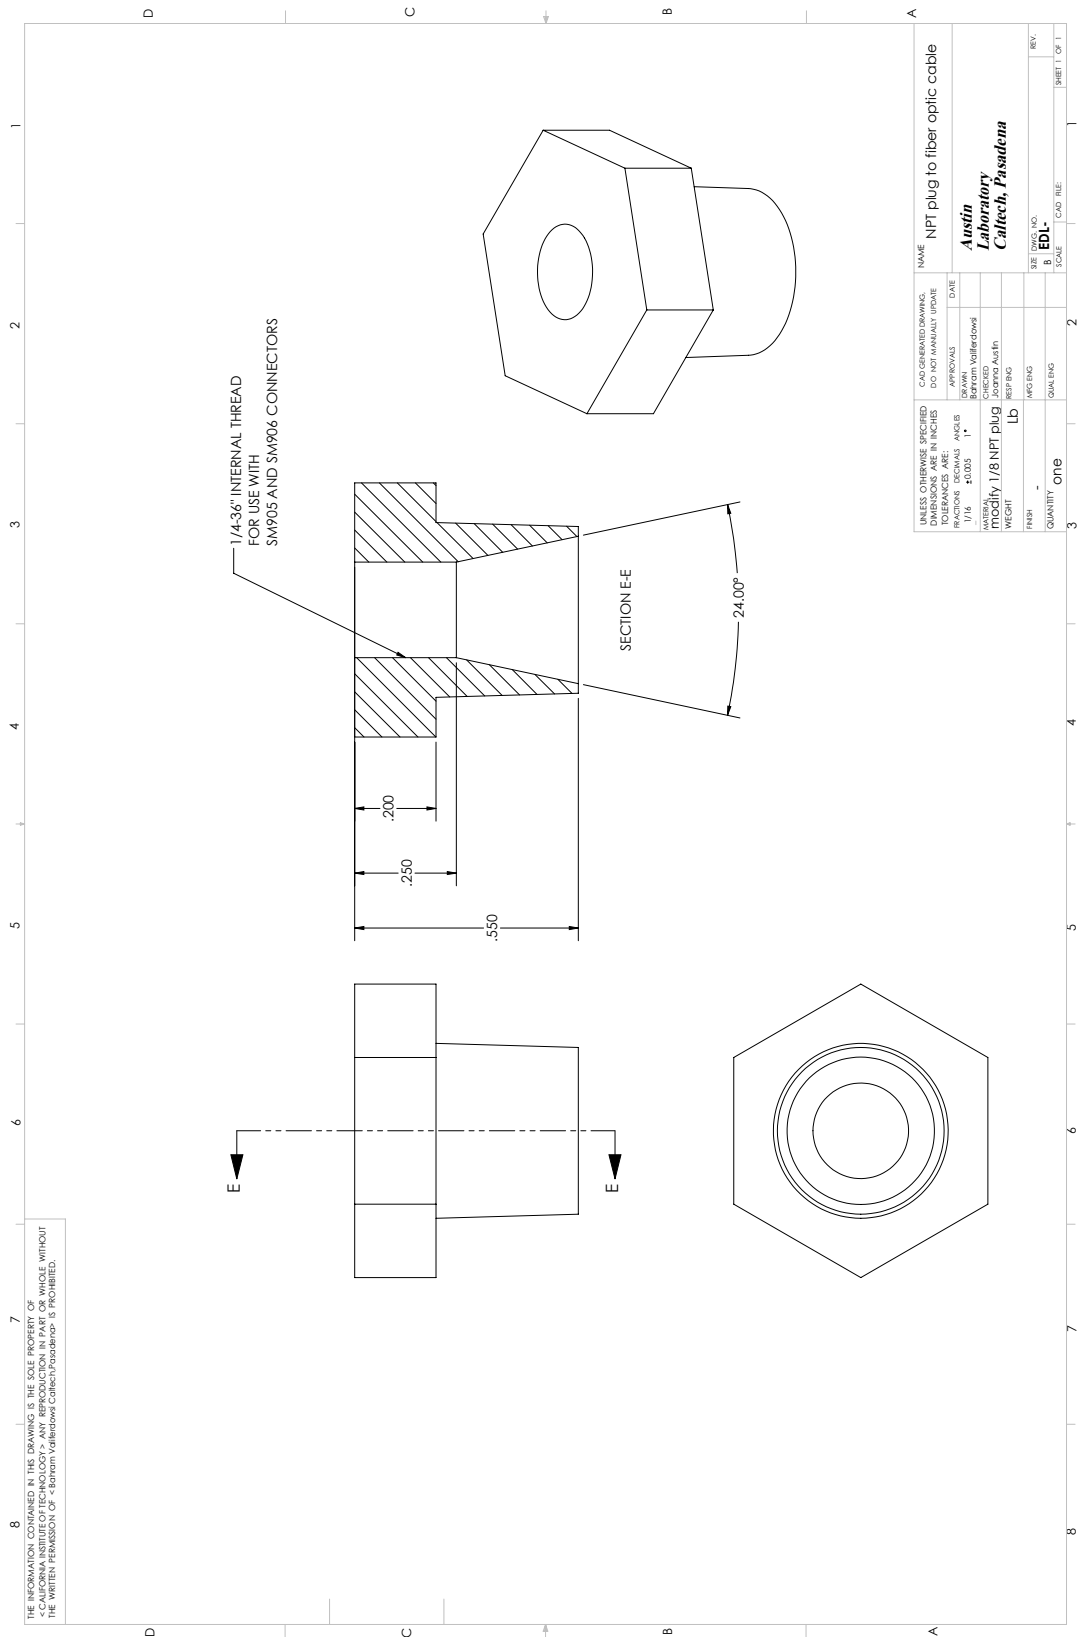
Freestream probe adaptor machine drawing modifying an NPT plug.
